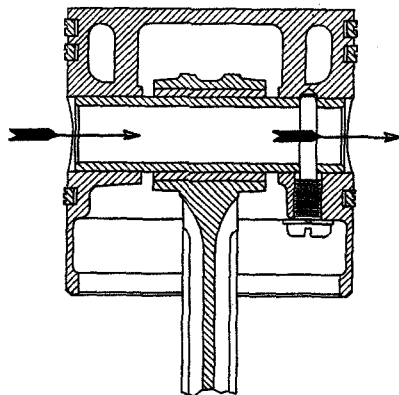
Piston pins should be pressed in and pressed out in the direction shown by the arrows.
